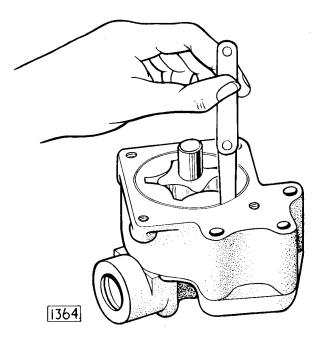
Measuring the clearance between the outer rotor and pump body
